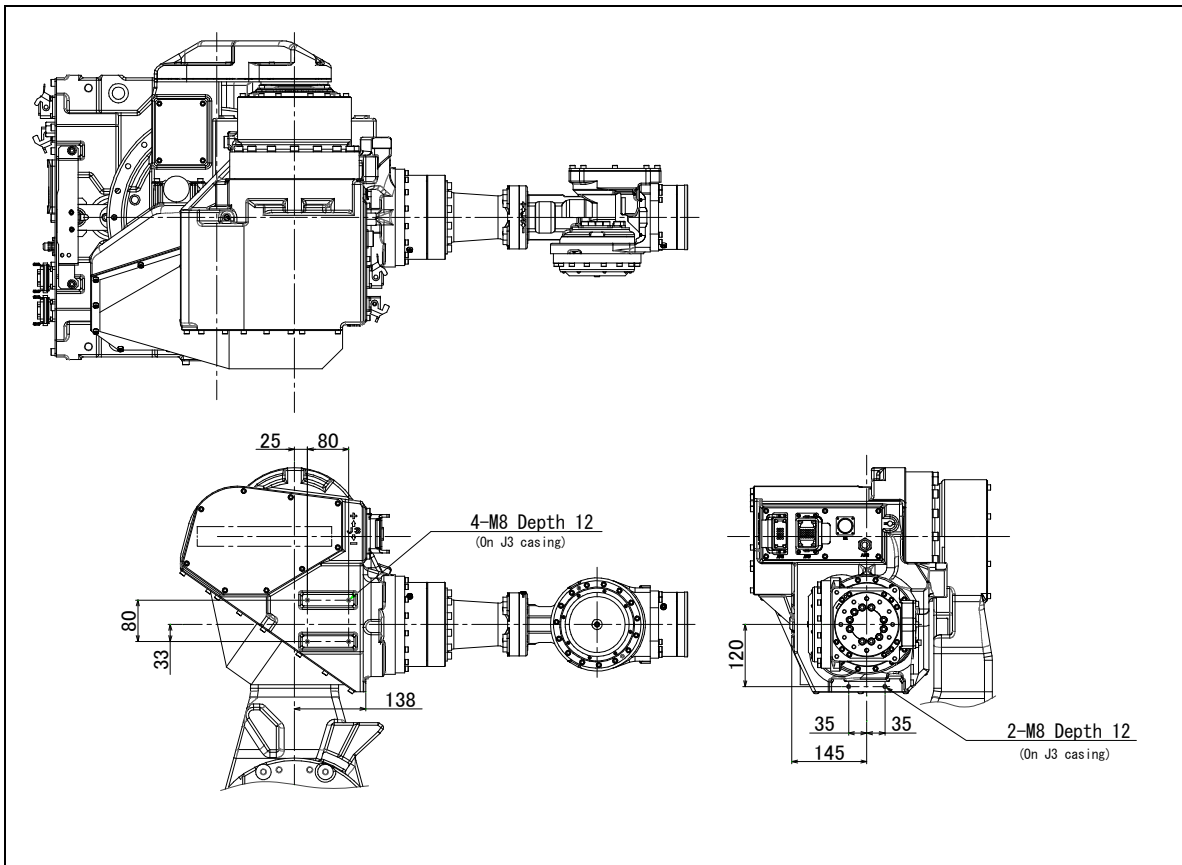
(c) Equipment mounting surfaces (M-710iC/50S)
